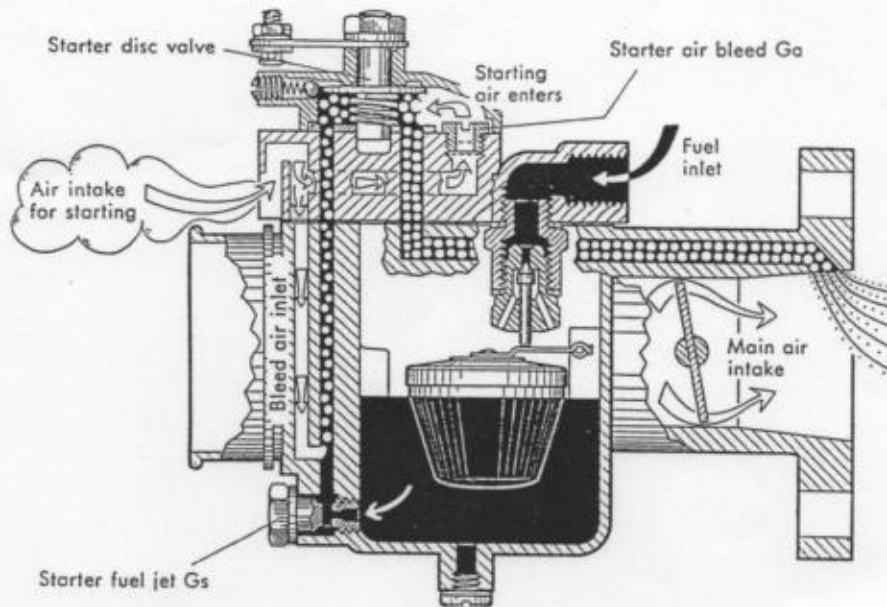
HR Downdraught Carburetter – Working Principle of Starter Unit
